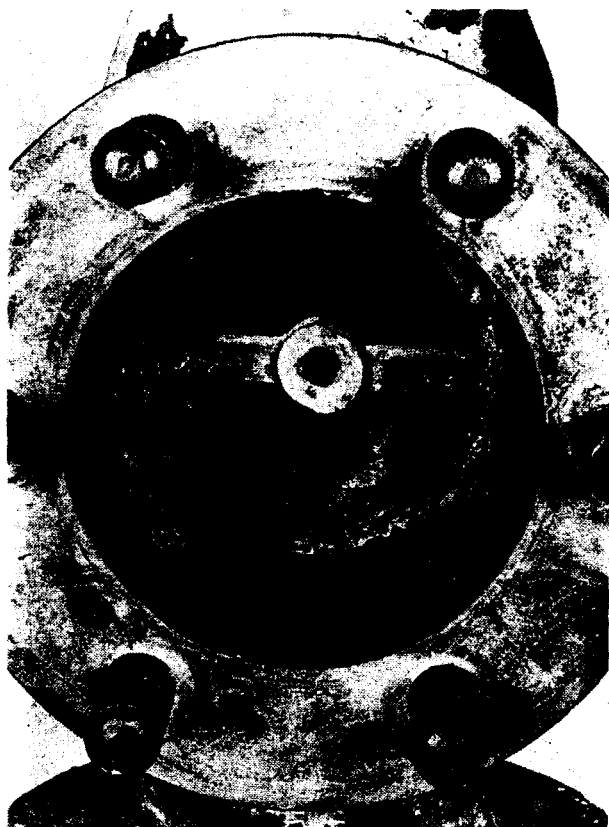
THE CORRODED SEAT OF A 3 IN. ADMIRALTY TYPE VALVE
